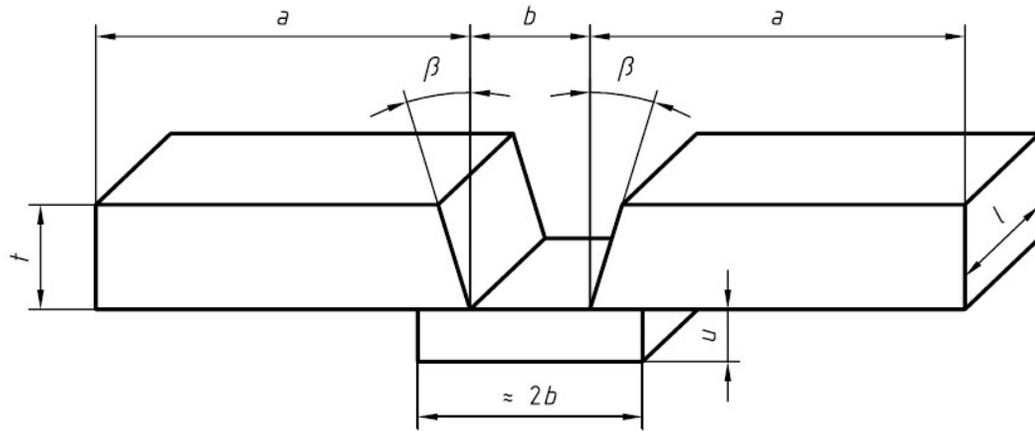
Schematic of All weld metal test coupon preparation set up. Source[77]
